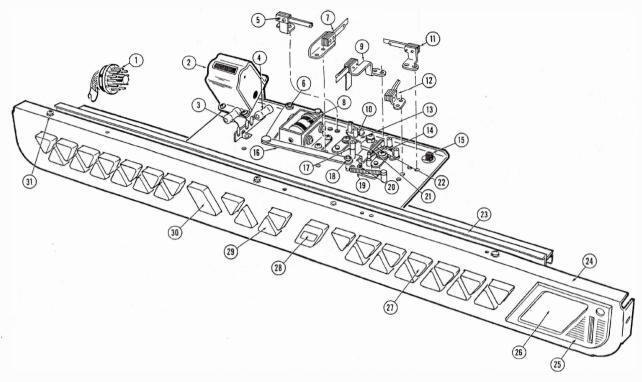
SELECTOR SWITCH ASSEMBLY, 2404-2404S
